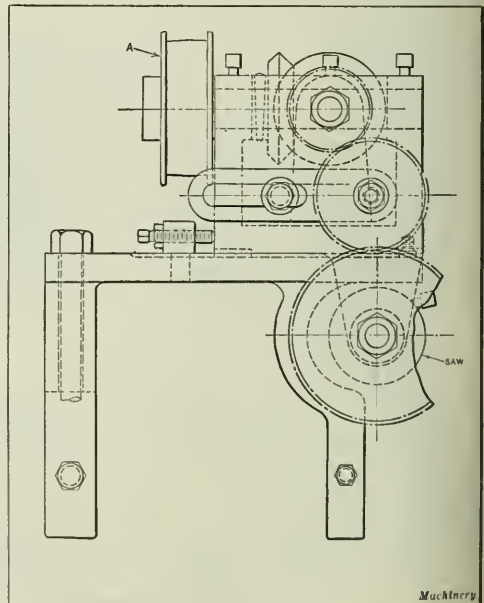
Saw Head for Five-spindle Automatic Screw Machine built by the Davenport Machine Tool Co., Inc.
